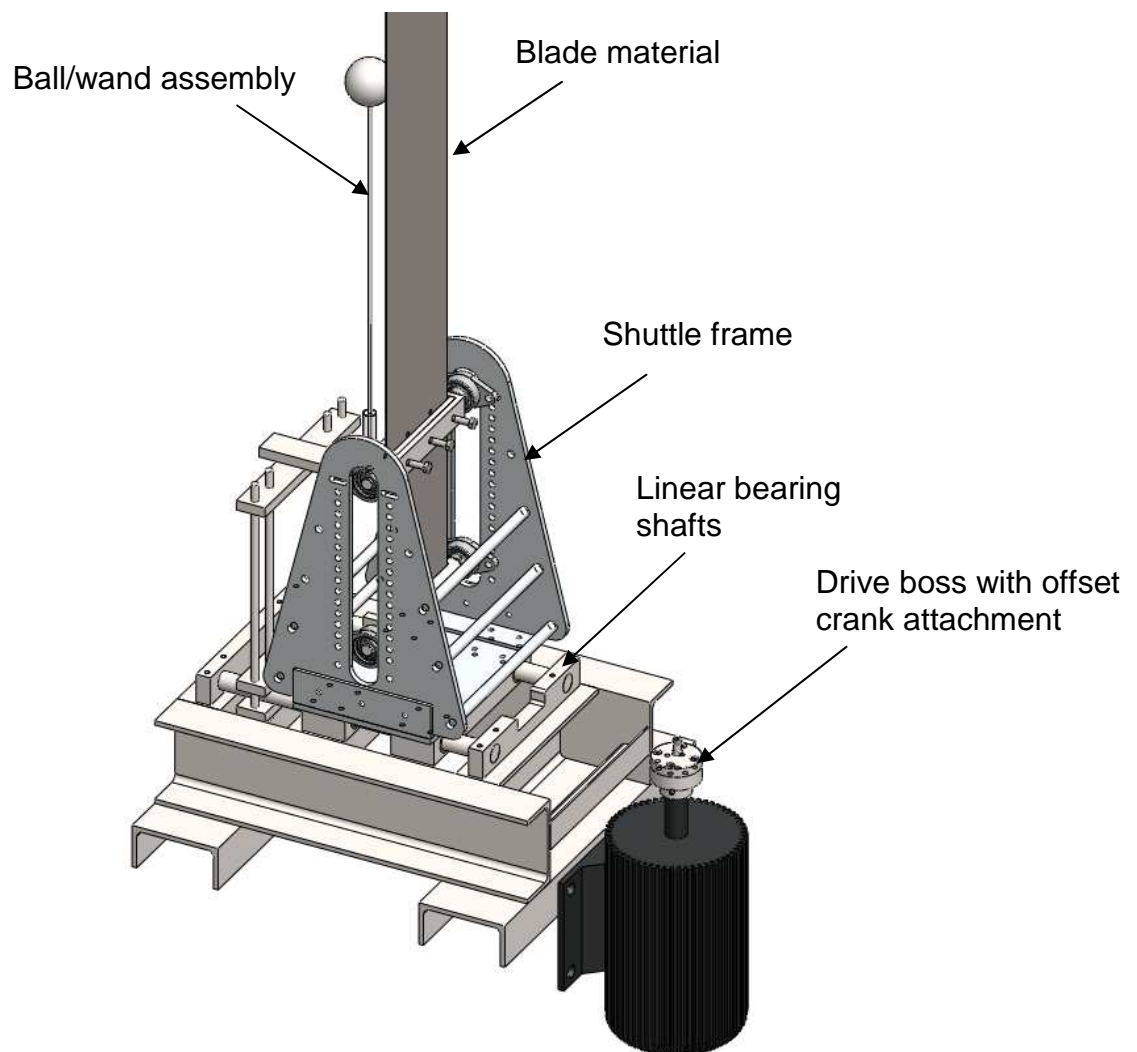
3D CAD model of Blade test rig omitting support legs and crank between electric motor and shuttle
